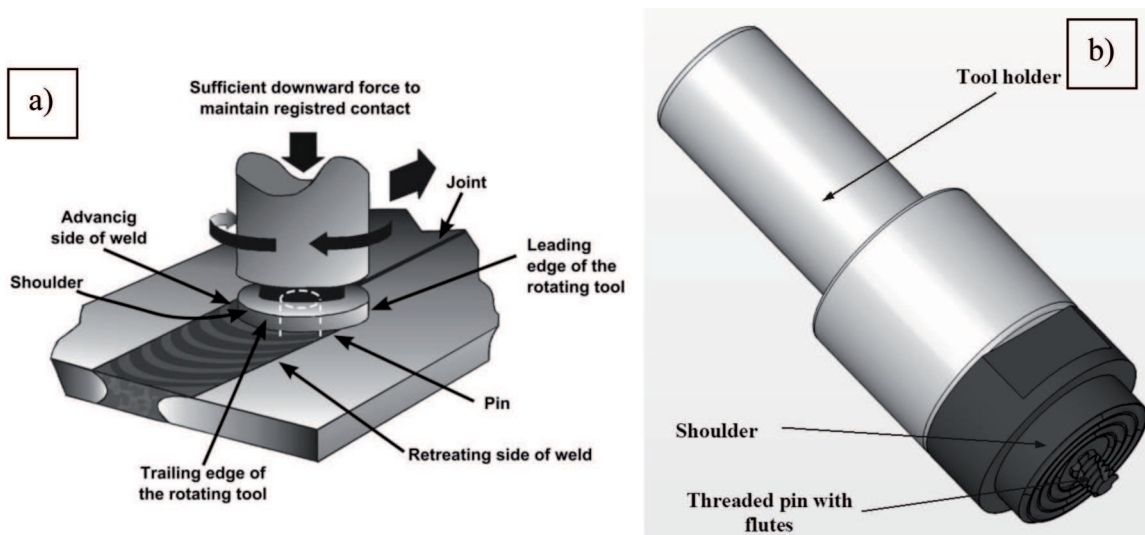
Schematic drawing of friction stir welding process a) and the tool b)
